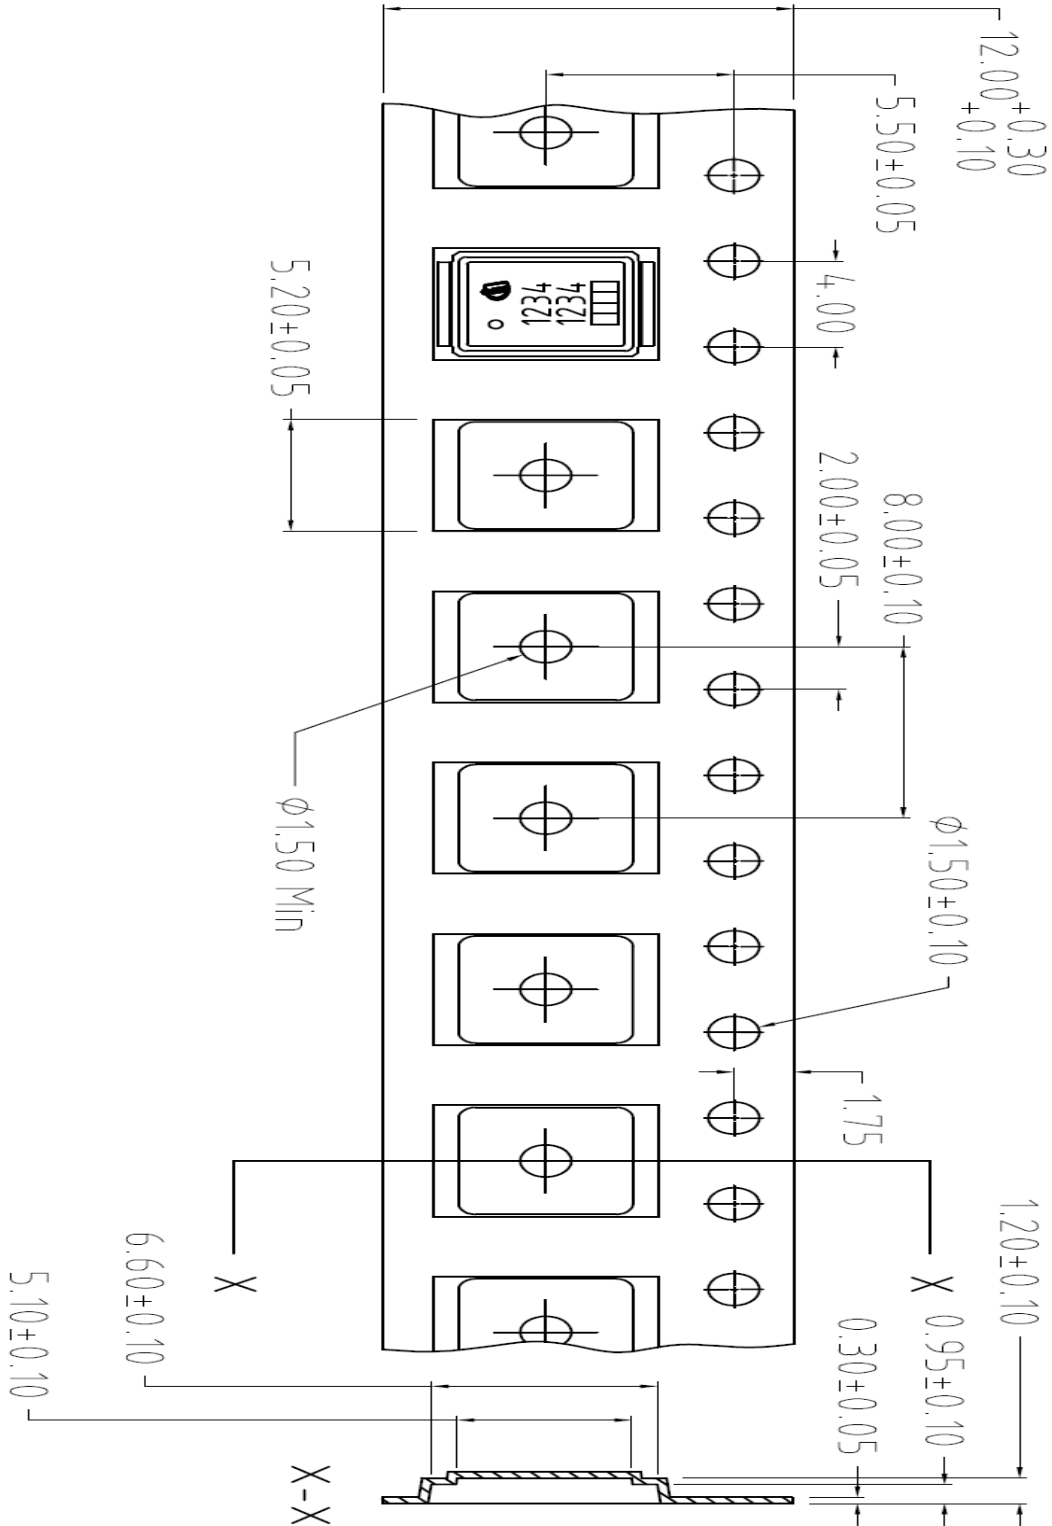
Outlines MG-WDSO-2, dimensions in mm/inches
